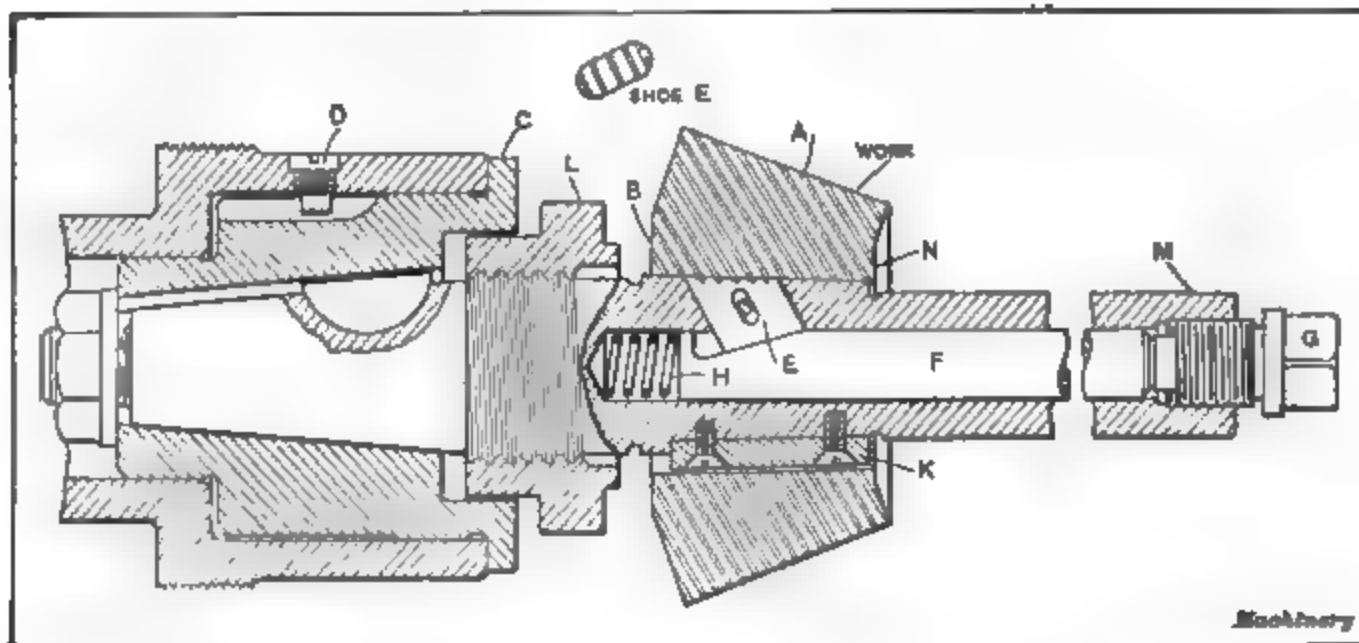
Arbor having Adjustable Shoe E which bears against Taper Bore of Pinion Blank
